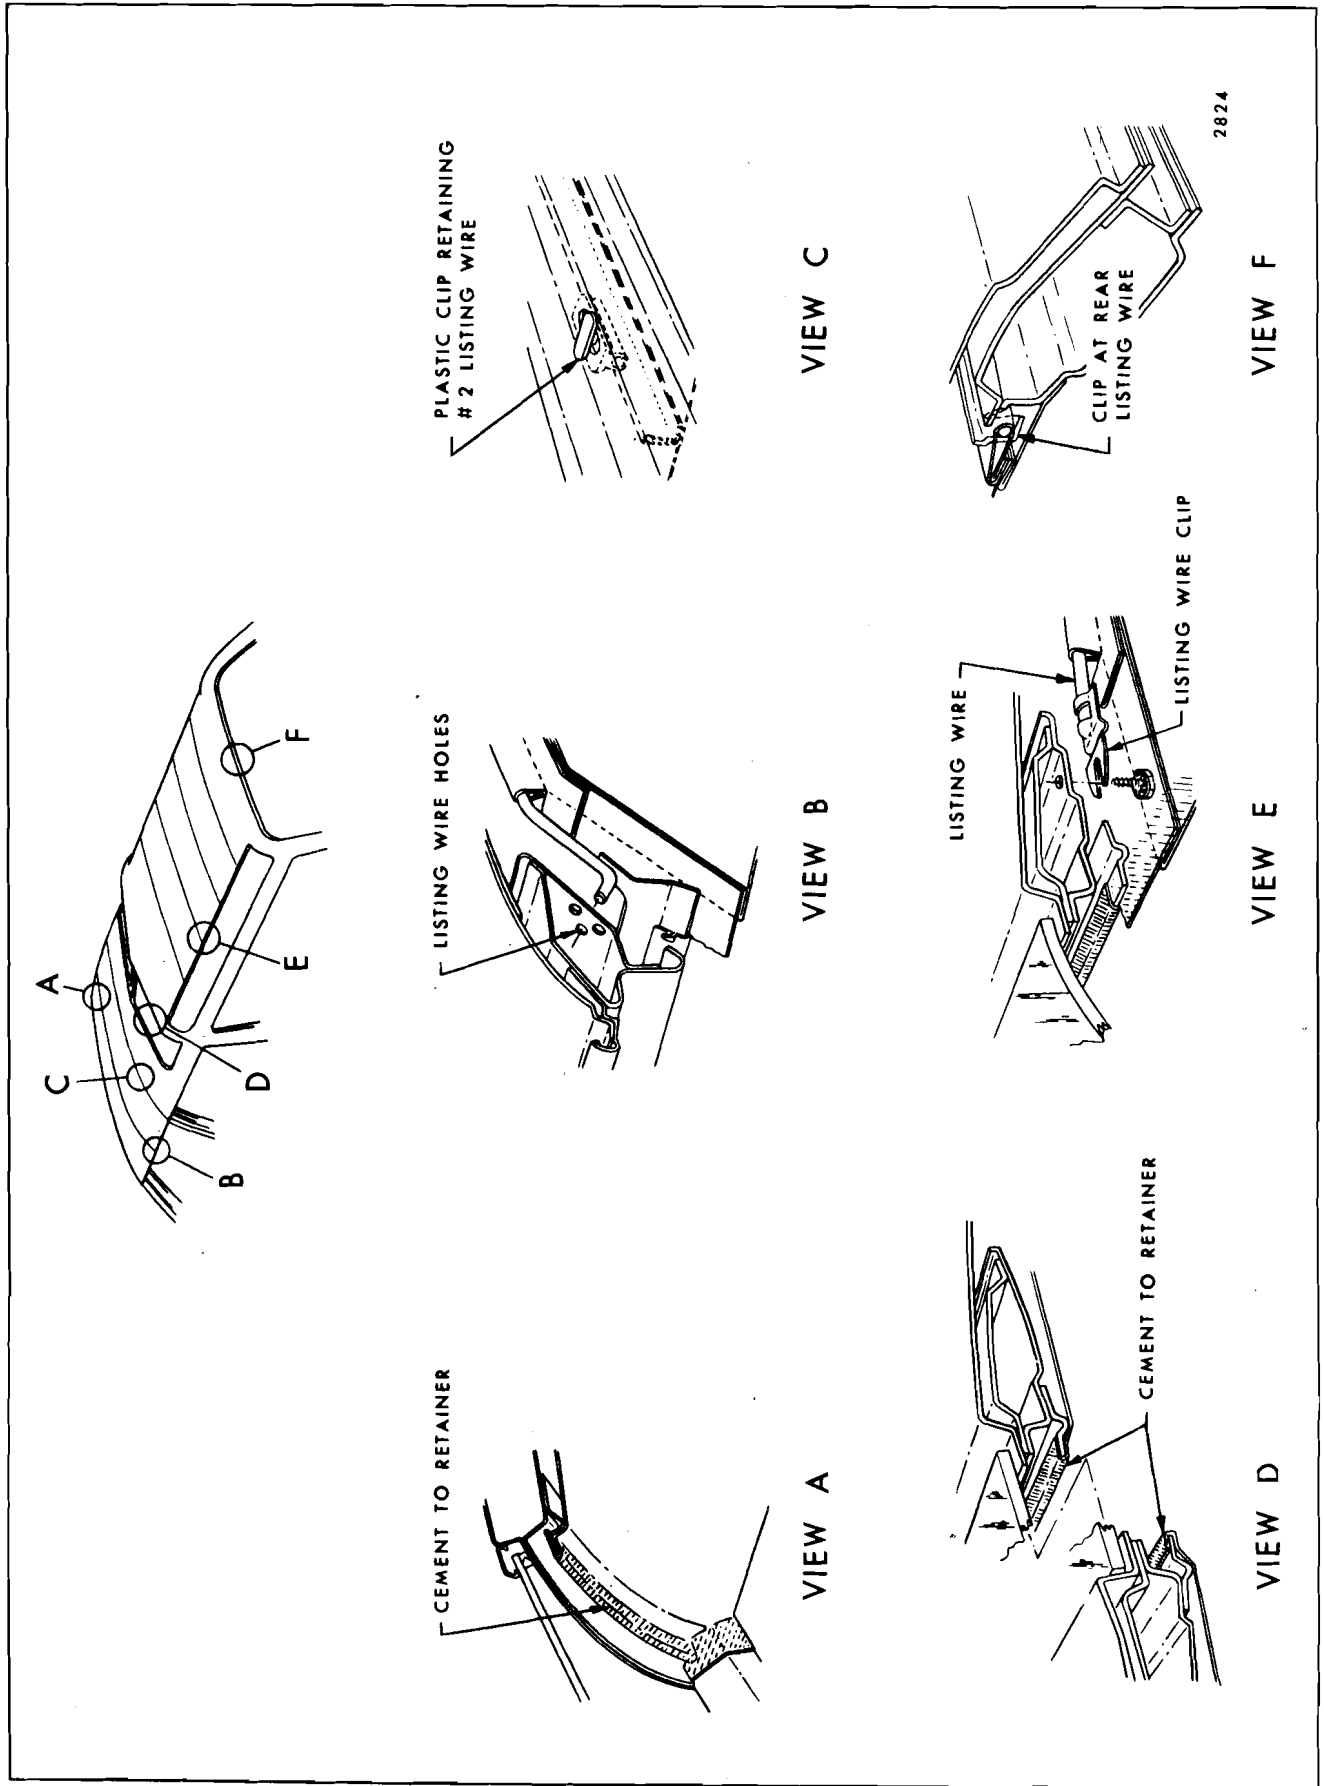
Headlining Installation "55, 65, 56, & 66" Styles
